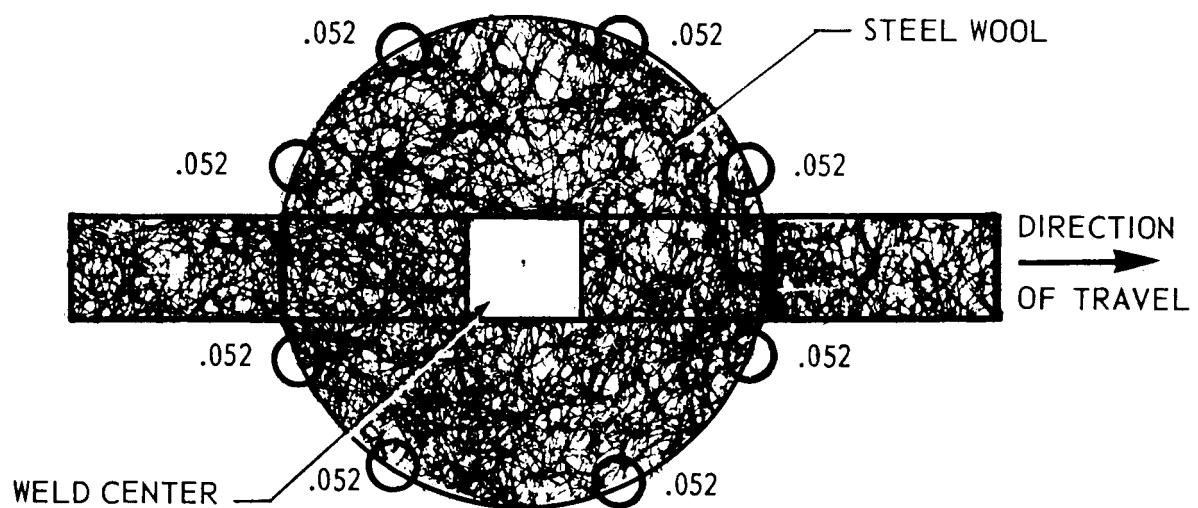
Jet Pattern of Six-inch Diameter Manifold Back of Plate Cooling
